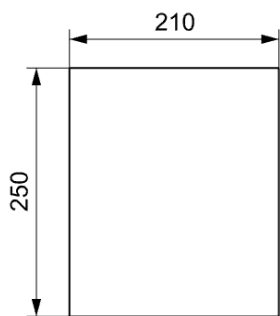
"0-90" carbon fibre cutout for the front inner and rear wheel shells.
